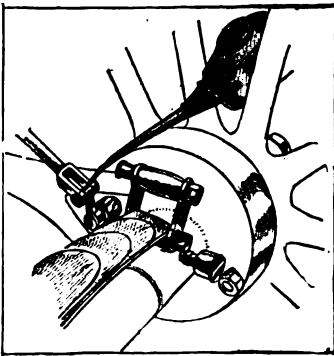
When a Ford axle shaft becomes bent at the hub it may quickly be straightened by the device shown. An old Ford hub is attached to a heavy piece of pipe several feet long and this is slipped on the bent axle end while the engine is turned over slowly with high gear engaged. The end of the pipe will move in a circle due to the bend and by pulling pipe back to axle center the axle can be straightened.
